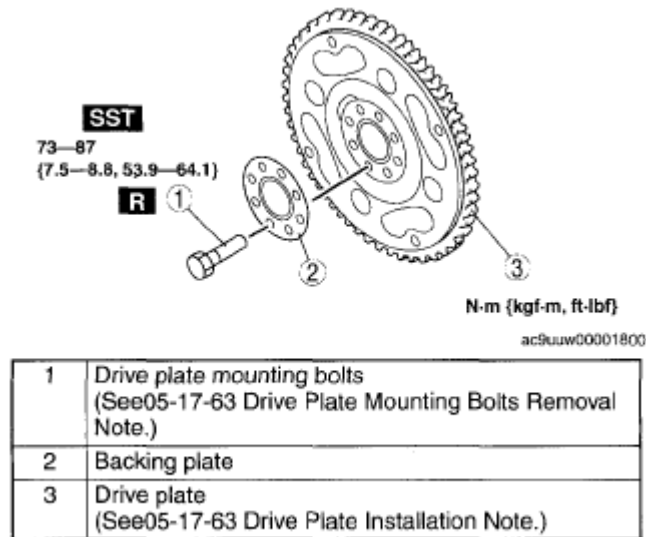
Identifying Drive Plate Mounting Bolts & Torque Specifications
